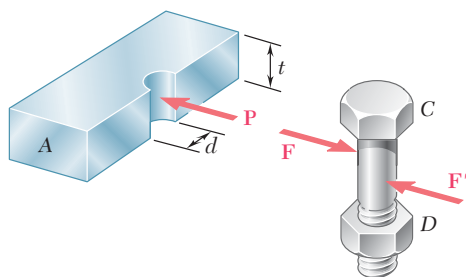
Equal and opposite forces between plate and bolt, exerted over bearing surfaces.
